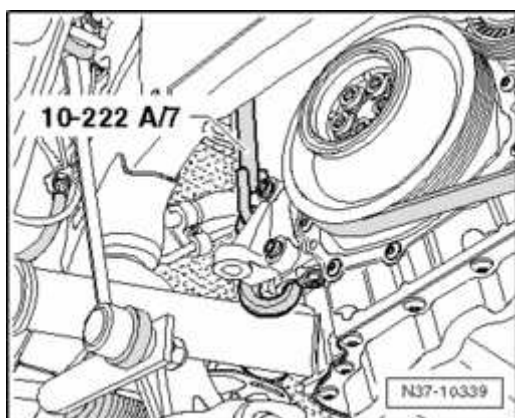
Adapter 10 - 222 A/7 Engaged On Engine Block
